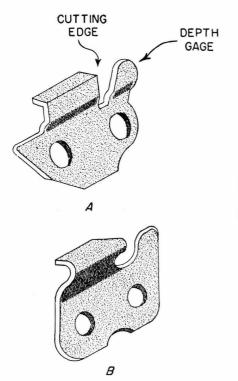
Chain-saw tooth patterns of the "chipper" type: A, The L-shaped tooth; B, the J-shaped tooth.
